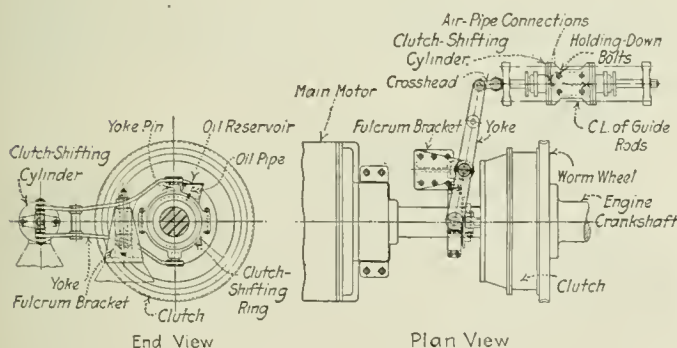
GENERAL ARRANGEMENT OF CLUTCH
